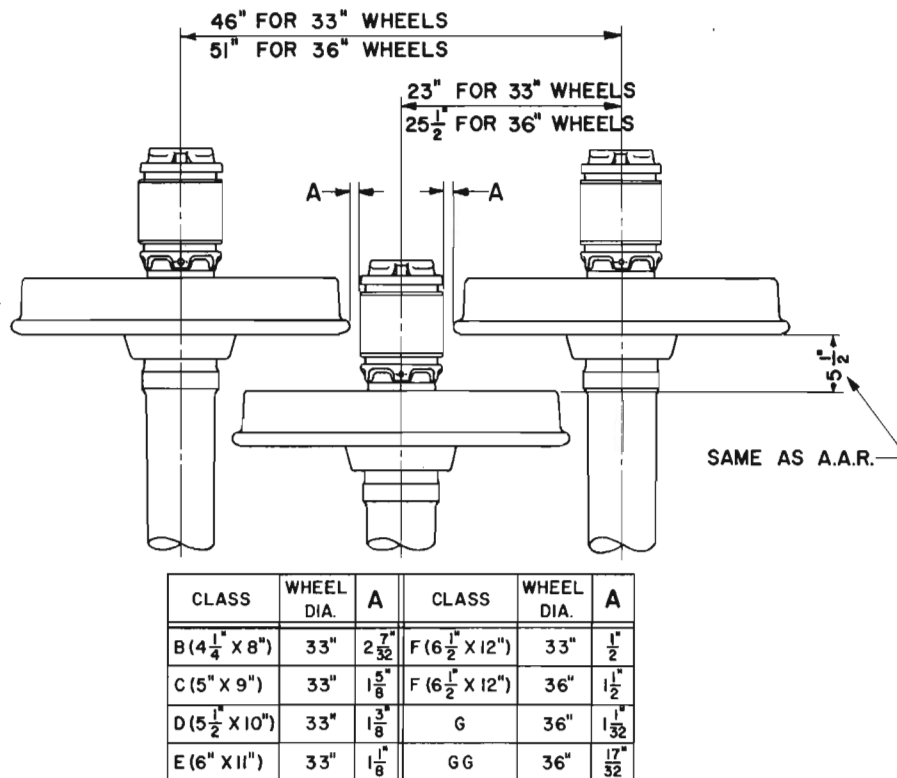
Wheel Rack Wheel Spacing Dimensions for Shipping Wheel and Axle Assemblies with Timken "AP" Roller Bearings Applied.
